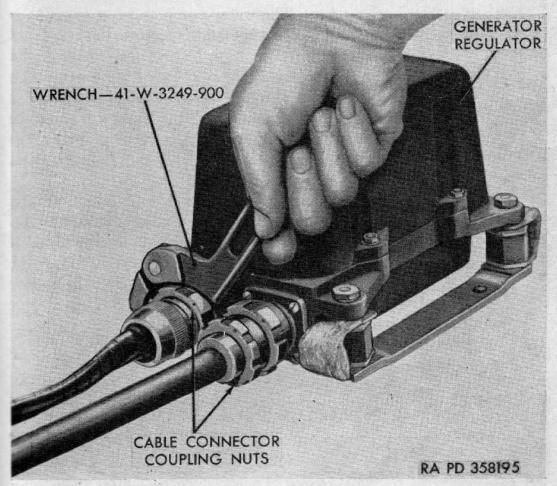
Tightening cable connector coupling nut with wrench 41-W-3249-900.
